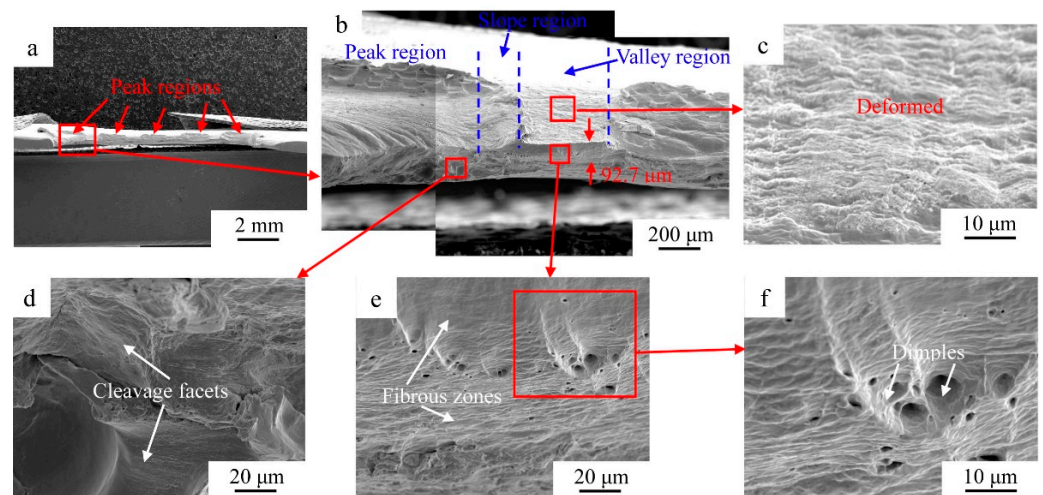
SEM images of the fracture surface of a joint processed with alcohol at 0.55 MPa welding pressure. (b) the enlarged drawing indicated in (a); (c–e) the enlarged drawing indicated in (b); (f) the enlarged drawing indicated in (e).
